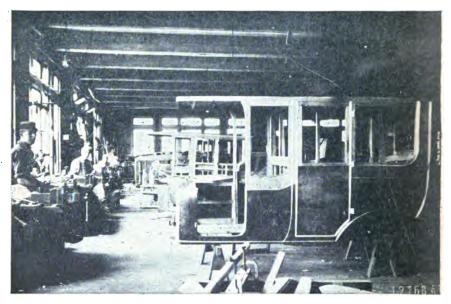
A small carriage maker who has converted his business to making automobile bodies.
